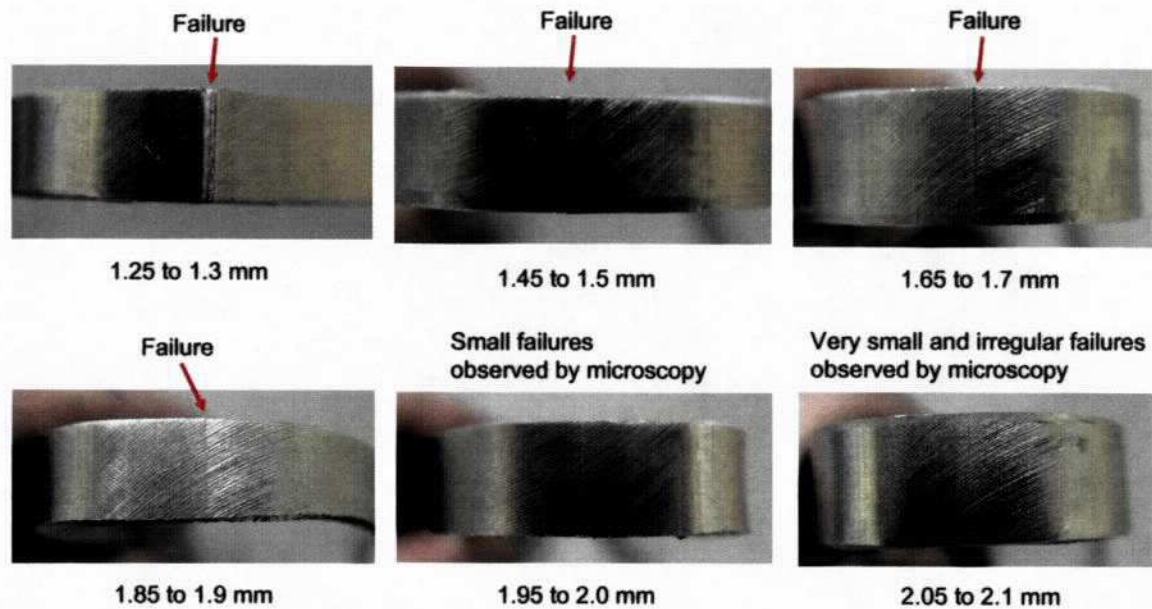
Bending test results for different pin penetrations as indicated along the weld.
